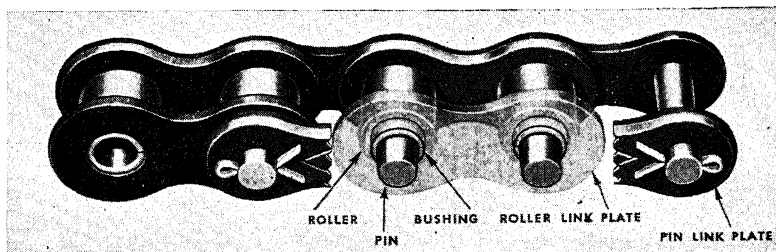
Construction of roller chain. (Courtesy Diamond Chain and Manufacturing Company.)
